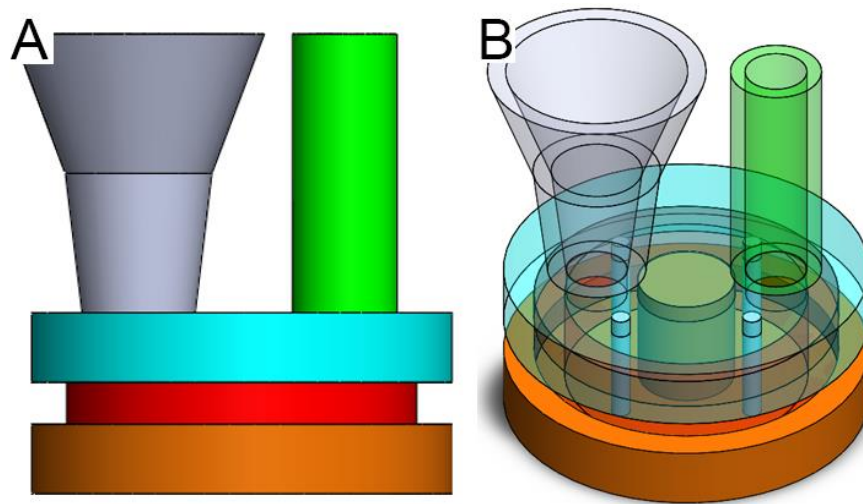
A) Section view of the mold showing the three pieces with different colours, the funnel and the chimneys. B) View of the mold with the lid, chimneys, and funnel transparent to see inside the mold.
